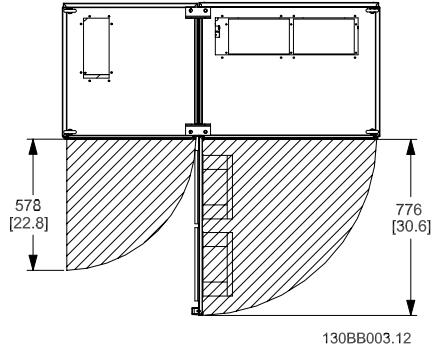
Space in front of IP21/IP54 enclosure type, frame size F1
